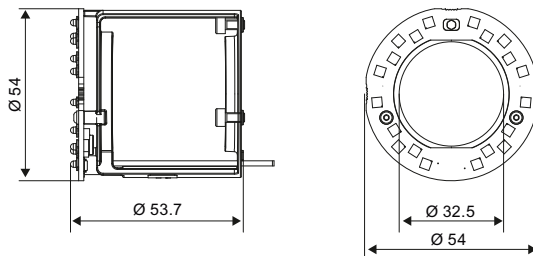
Built-in ring light \varnothing 54 mm dimension drawing
